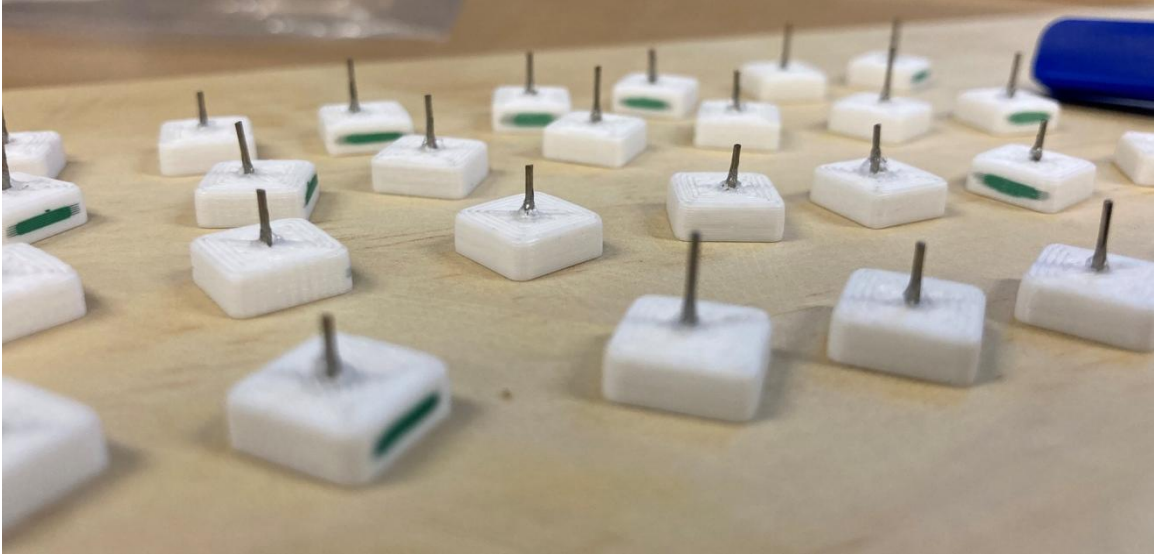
Sealing the Bottom Union of the Plastic Adapter Body and the Stainless Steel Barb with Glue.
